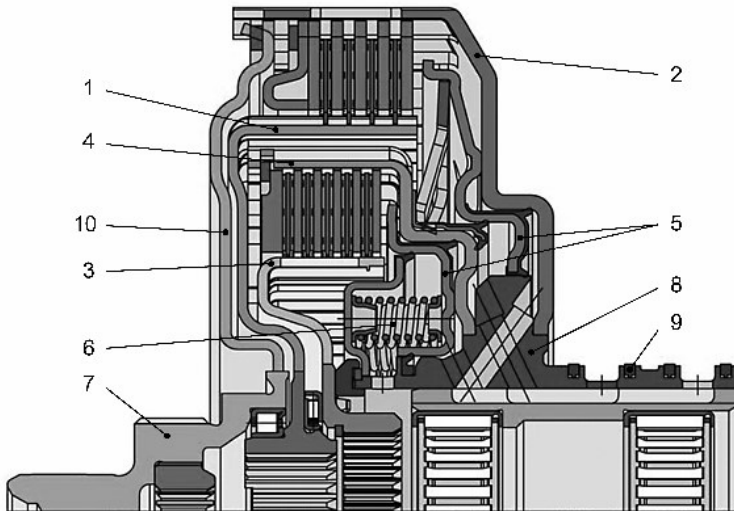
Wet friction dual-clutch of VW (BorgWarner) [25]. 1 Inner plate carrier of the outer clutch; 2 Outer plate carrier of the outer clutch; 3 Inner plate carrier of the inner clutch; 4 Outer plate carrier of inner clutch; 5 Piston; 6 Compression spring; 7 Input hub; 8 Drum; 9 Sealing ring; 10 Driving plate
